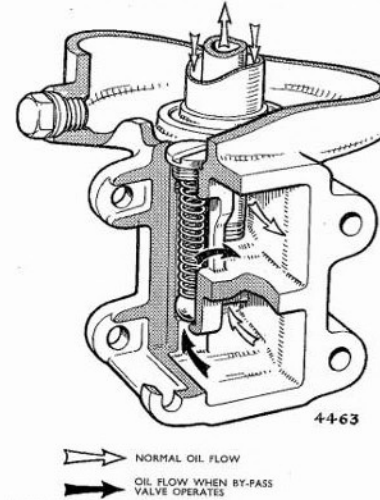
Part section view showing the oil filter by-pass valve operation
